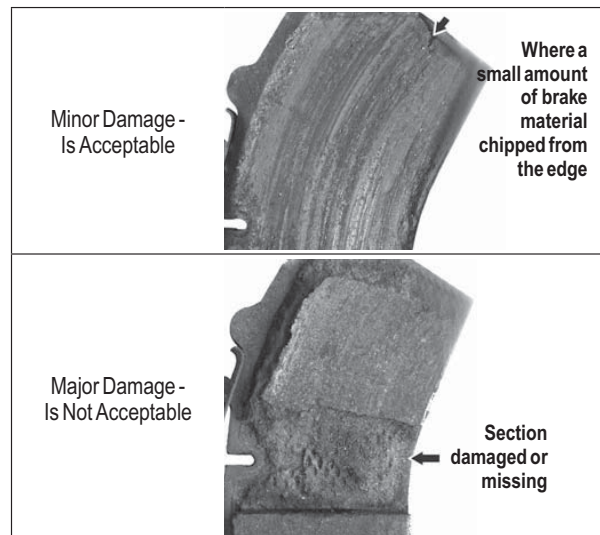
BRAKE PAD SURFACE INSPECTION
